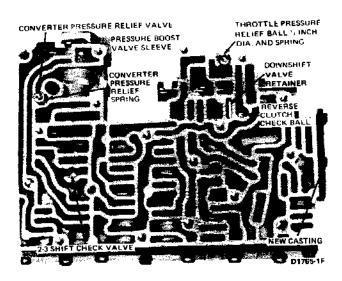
Converter Pressure Relief Valve, Throttle Pressure Relief Valve, and 2-3 Shift Check Valve Locations
